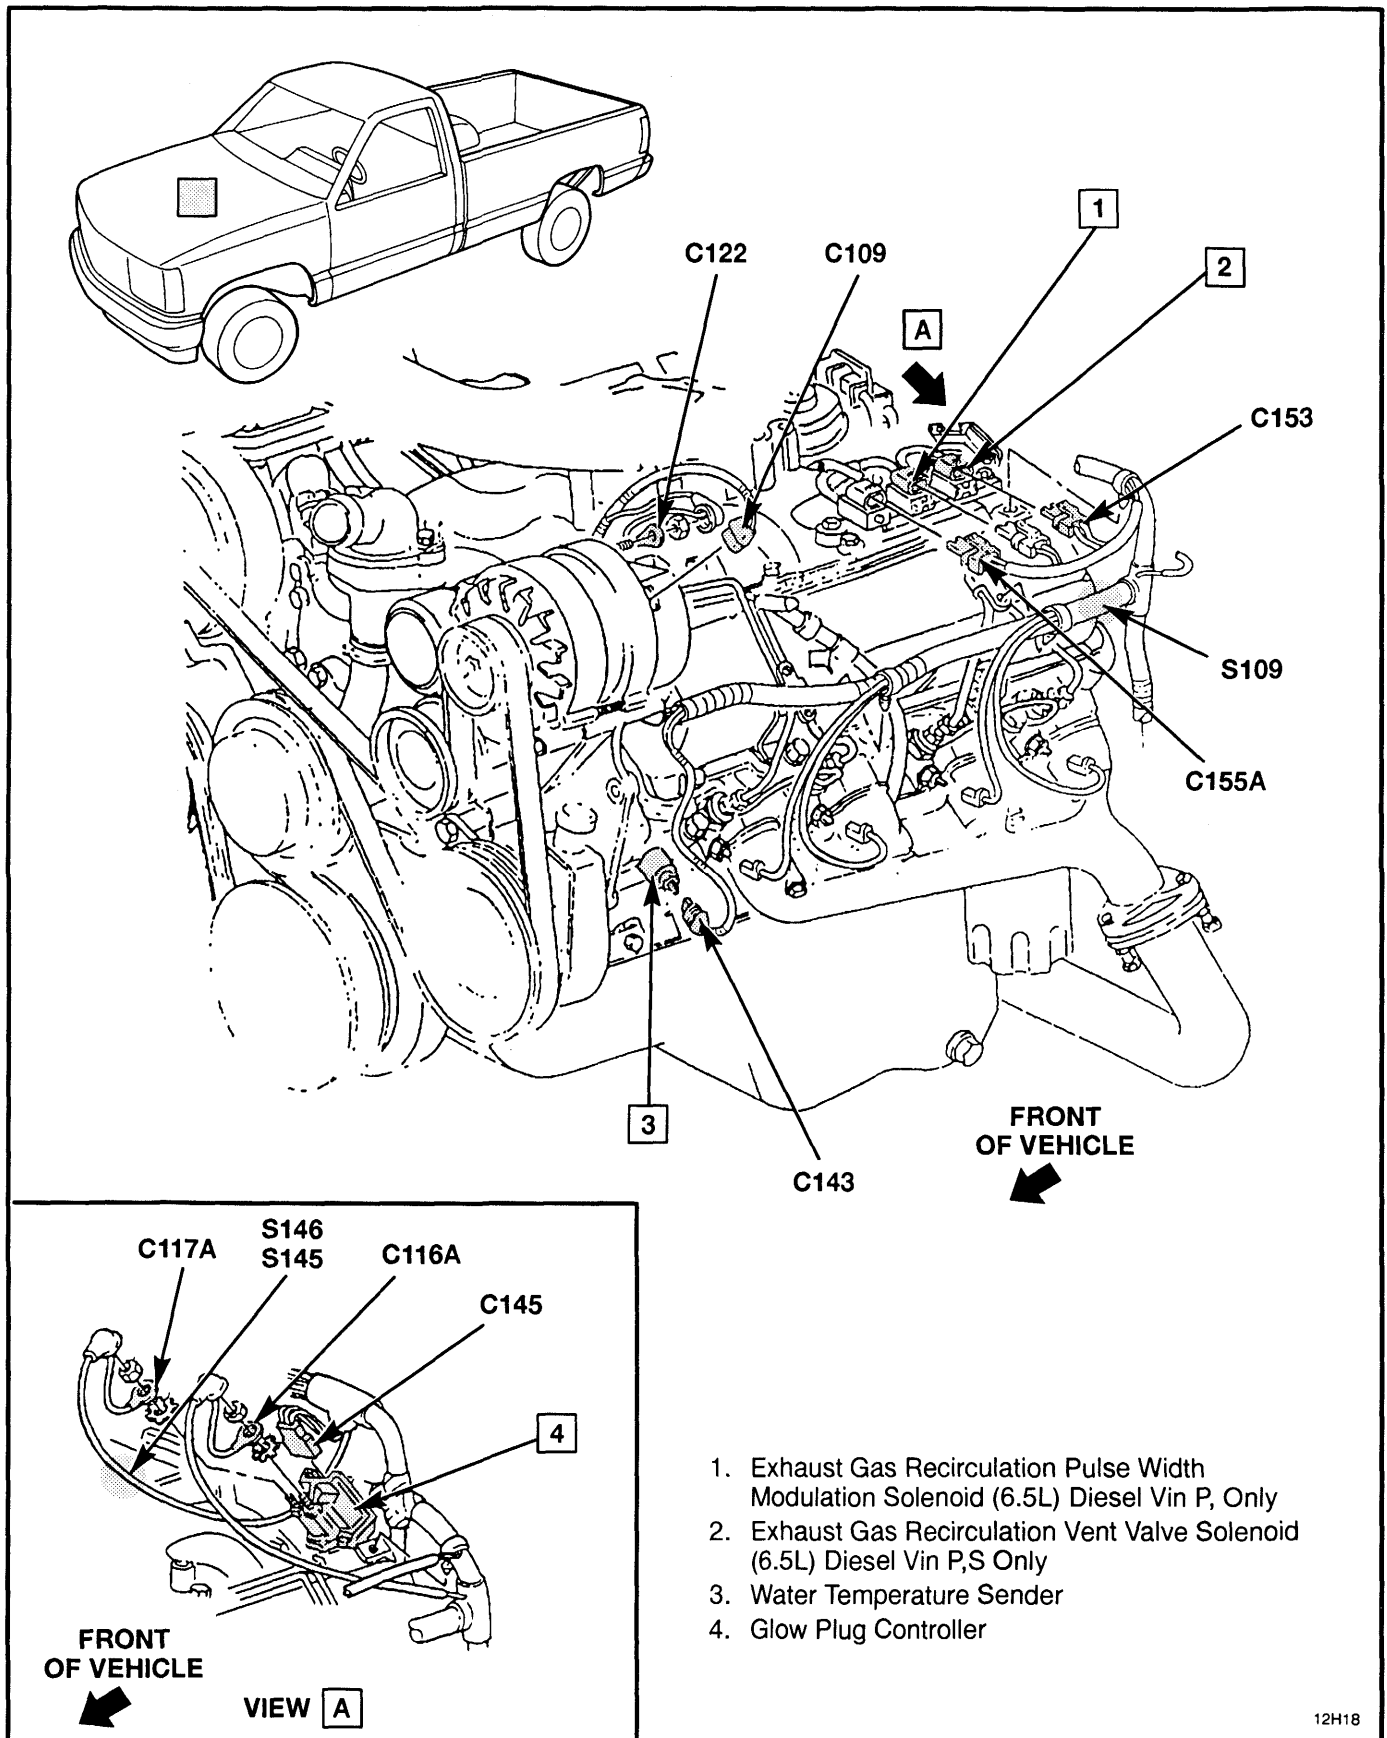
6.5L Diesel Engine Wiring, LH Side
